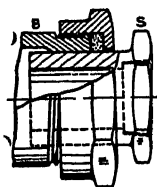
Floating Slip Type Expansion Joint for Threaded Pipe.
